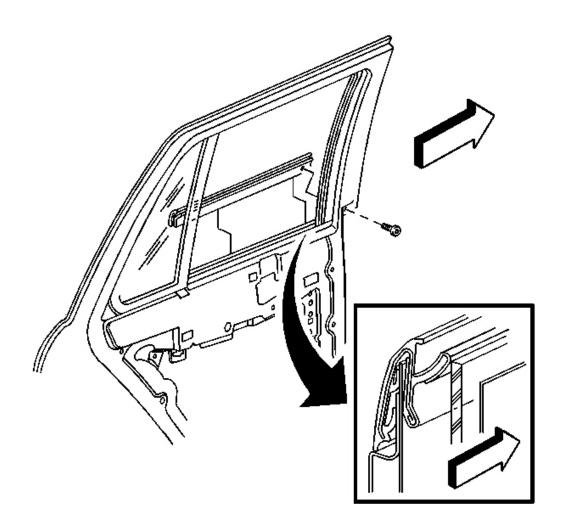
Identifying Sealing Strip (Rear Door Window Belt Outer) Courtesy of GENERAL MOTORS CORP.
